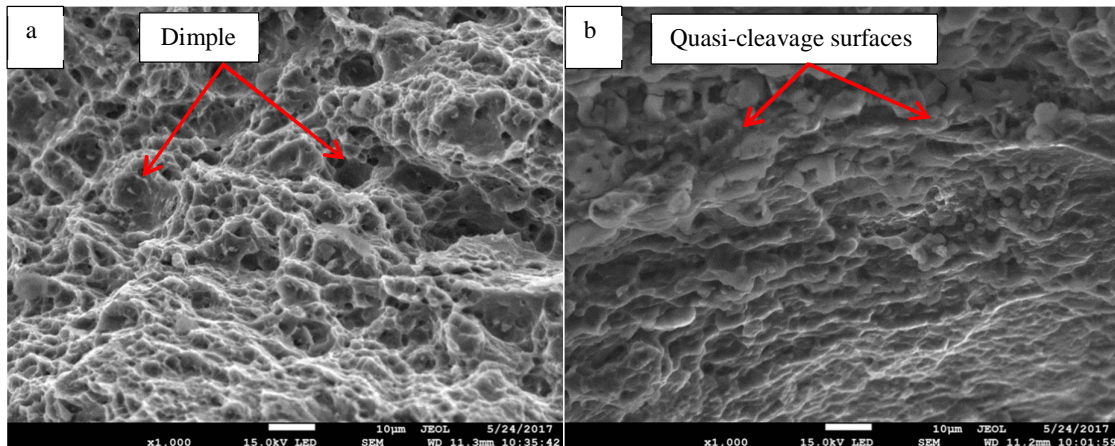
(a) SEM images of fracture surface on AA6061 (b) SEM images of fracture surface on AZ31B.
